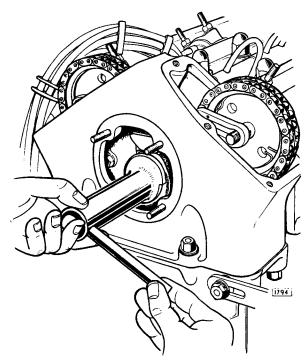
Adjusting the top timing chain using Churchill Tool Number J.2.
